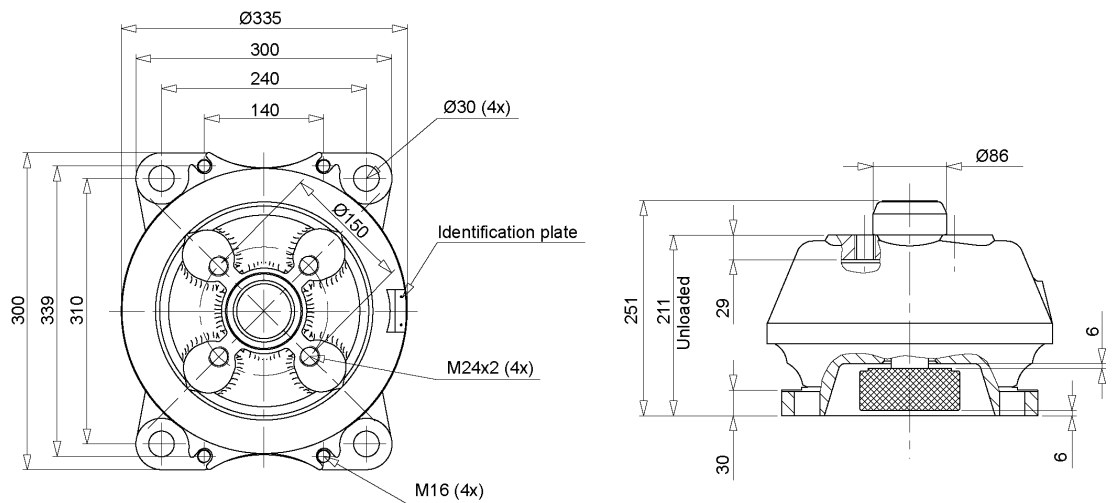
Rubber mount, V-engines (DAAE018766b)
